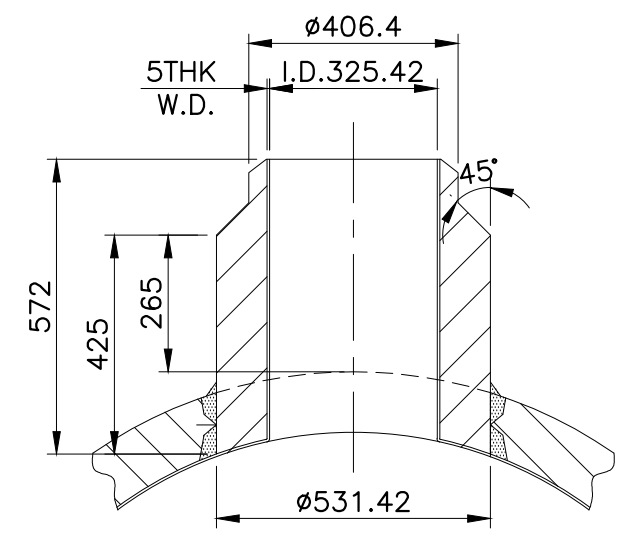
DETAIL OF C/S & L/S WELD FOR MAIN SHELL
